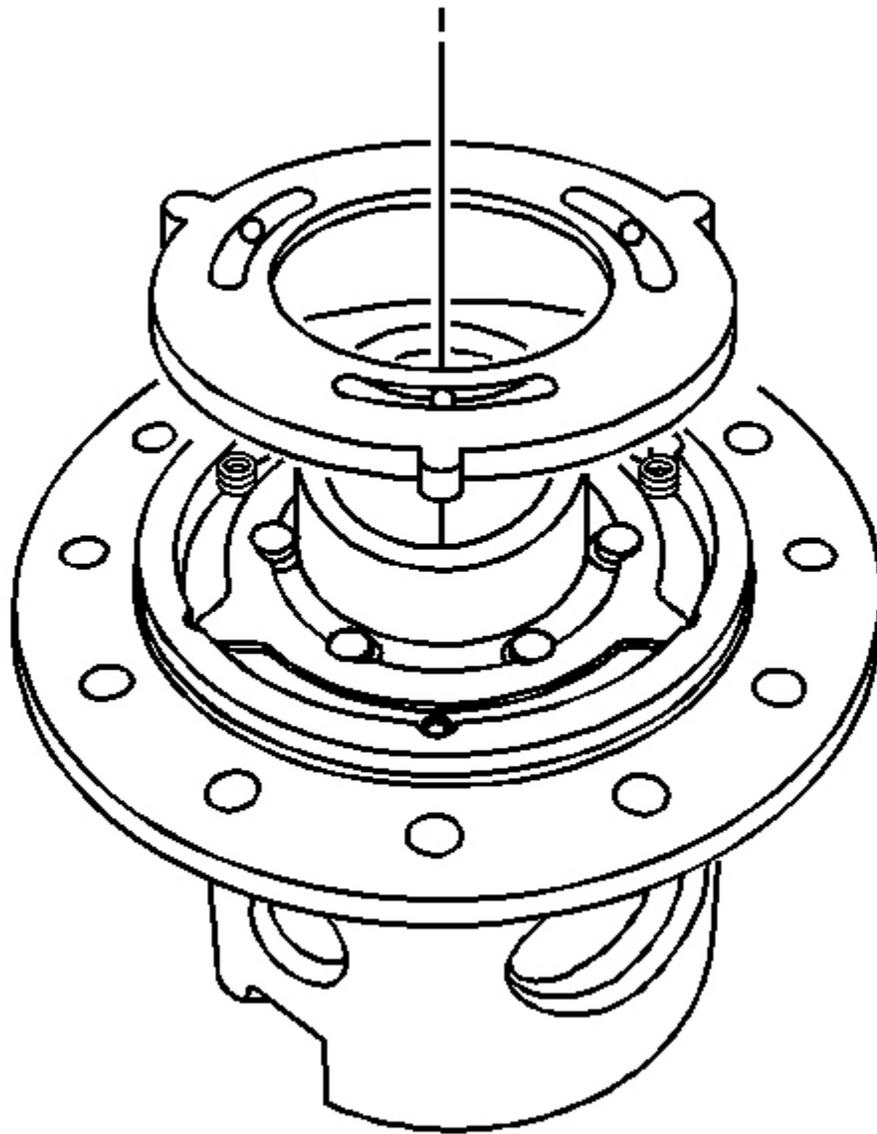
Inboard Locking Differential Ball Bearing Plate
